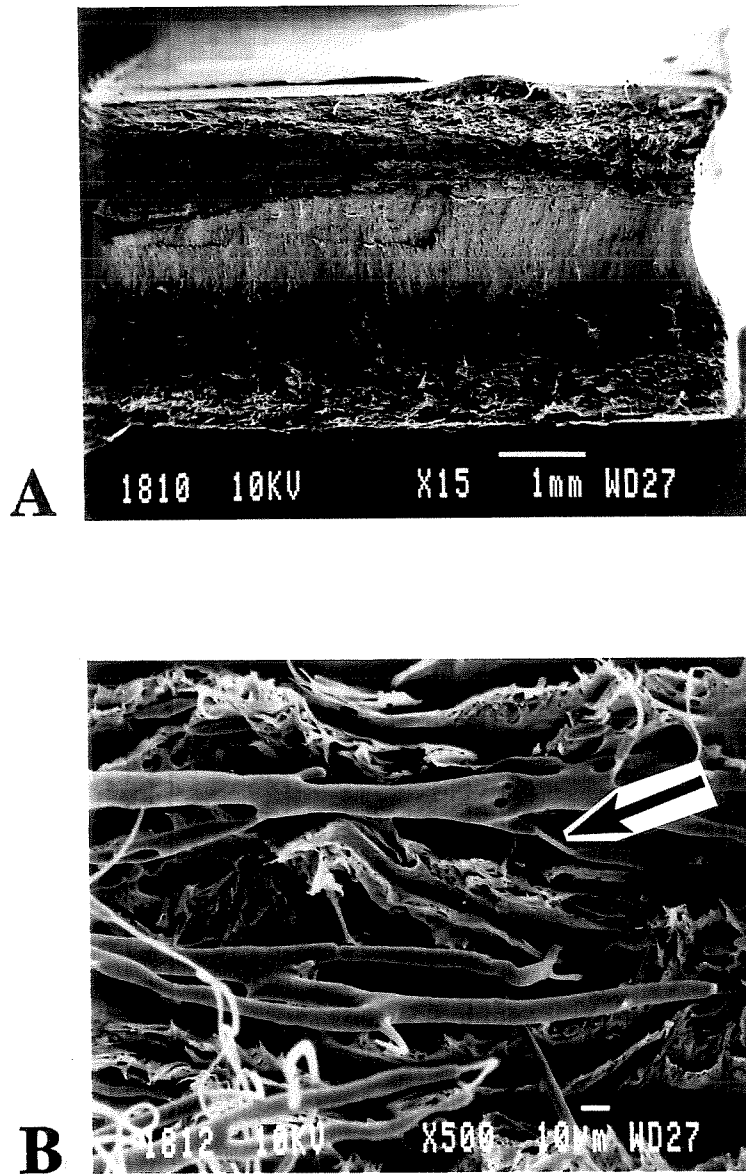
Micrographs of rupture surfaces (perpendicular to flow view) of tested non-compatible type II specimens containing a weldline (position M). A) whole cross-section, B) skin
